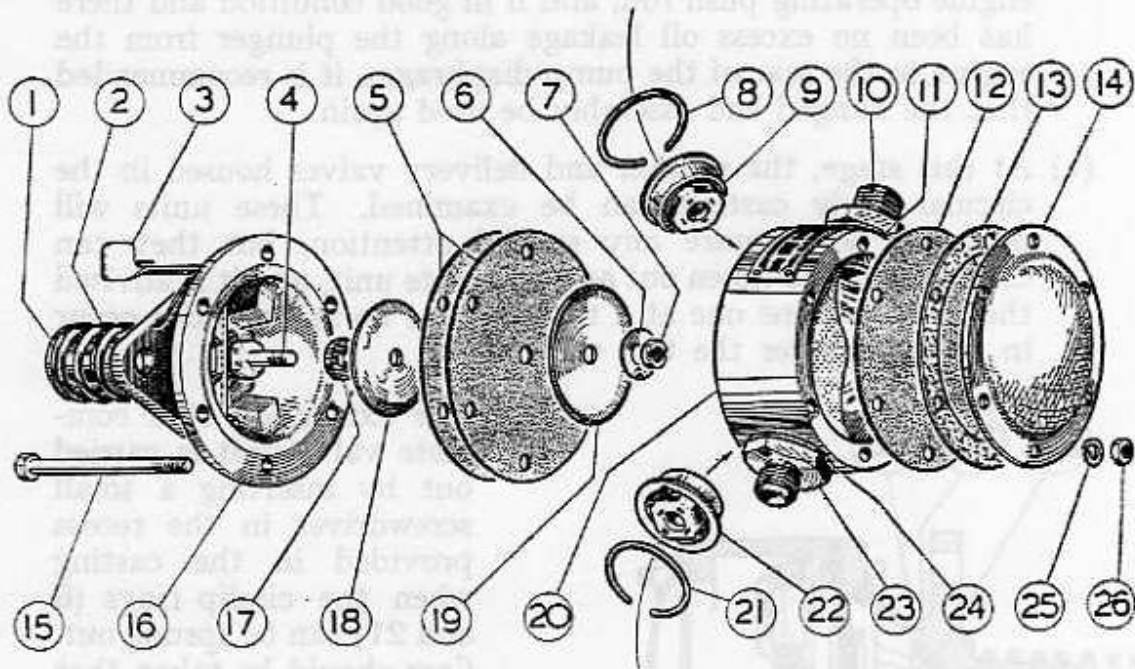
EXPLODED VIEW OF "DAVID" FUEL PUMP.
